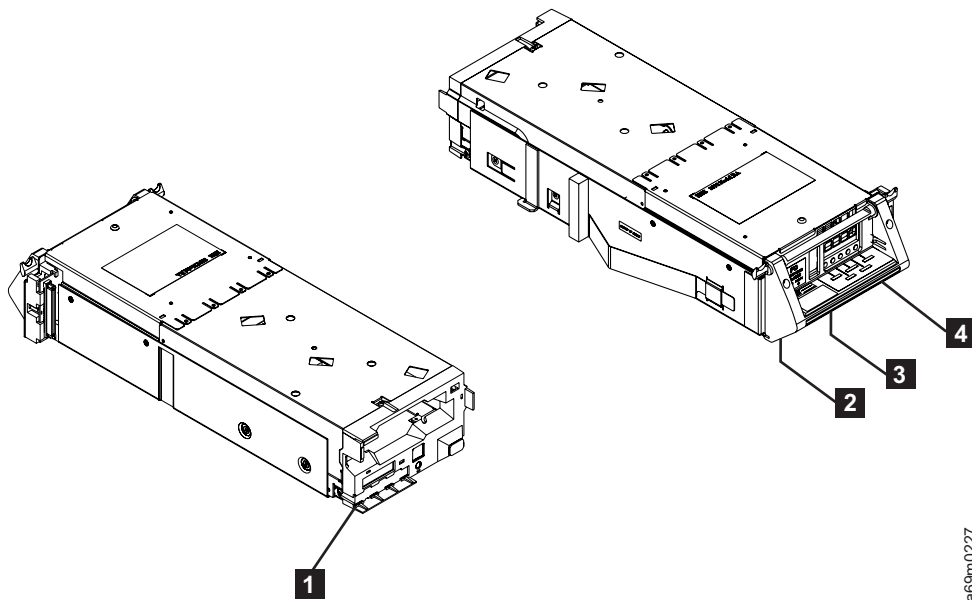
Removing or Replacing a Drive Canister Assembly - 3592 Fibre Hot Swap
